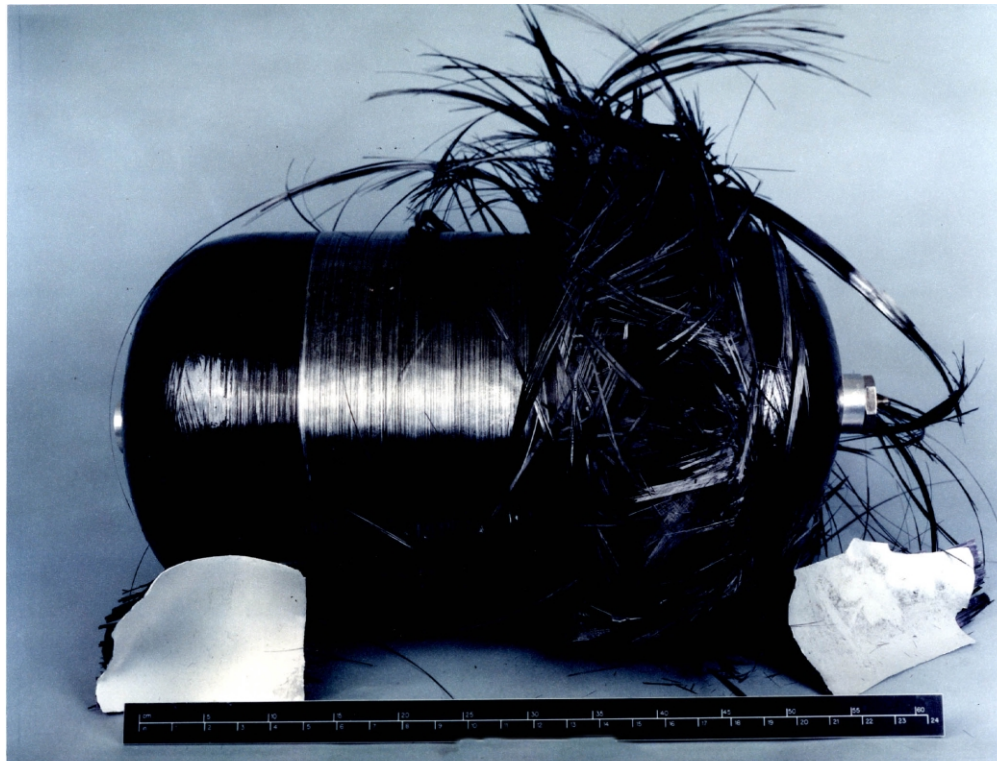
Typical burst after impact of a large cylindrical COPV.
